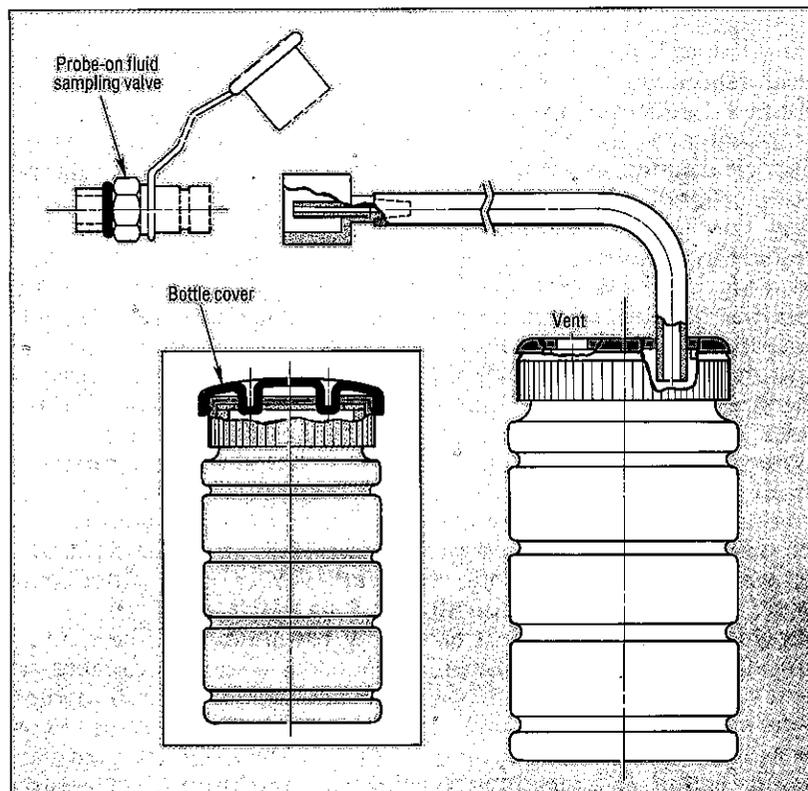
Probe-on-style, hydraulic-fluid sampling valve system consists of a sampling valve, plastic tubing with a probe on one end, and a sampling bottle with a lid having two finger-like extensions, which stop-up two ports in the bottle cover.
